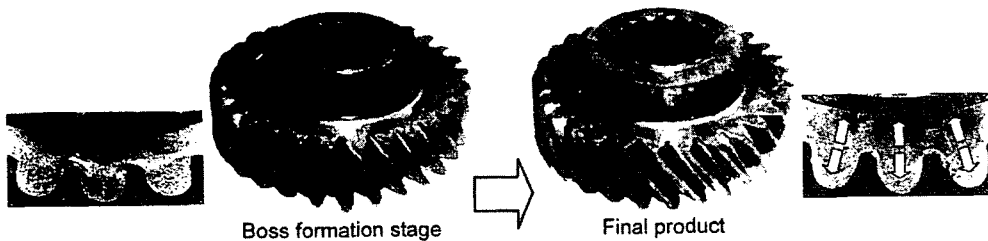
Helical gear with boss, internal spline and grooves [5]
